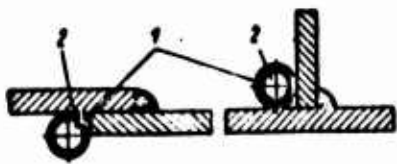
Protection of reverse side of seam during welding of tee, overlap and corner seams: 1 — tube with holes; 2 — argon.
